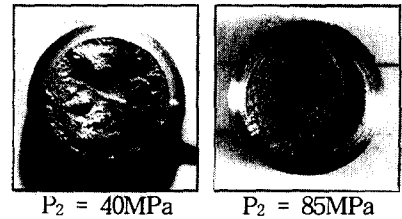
Tensile fracture surfaces(Mag. 1.1)
